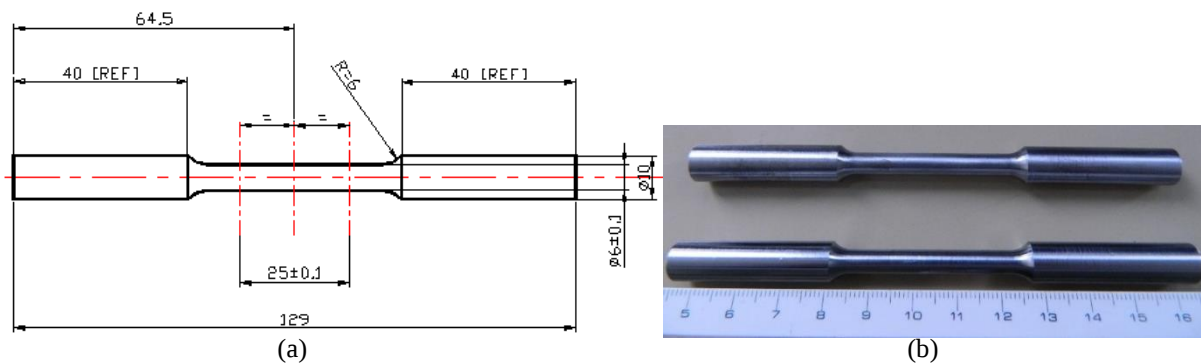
Schematic illustration: (a) geometry and dimensions of sub-size tensile specimens; (b) sub-size tensile specimens employed in the experiments.
